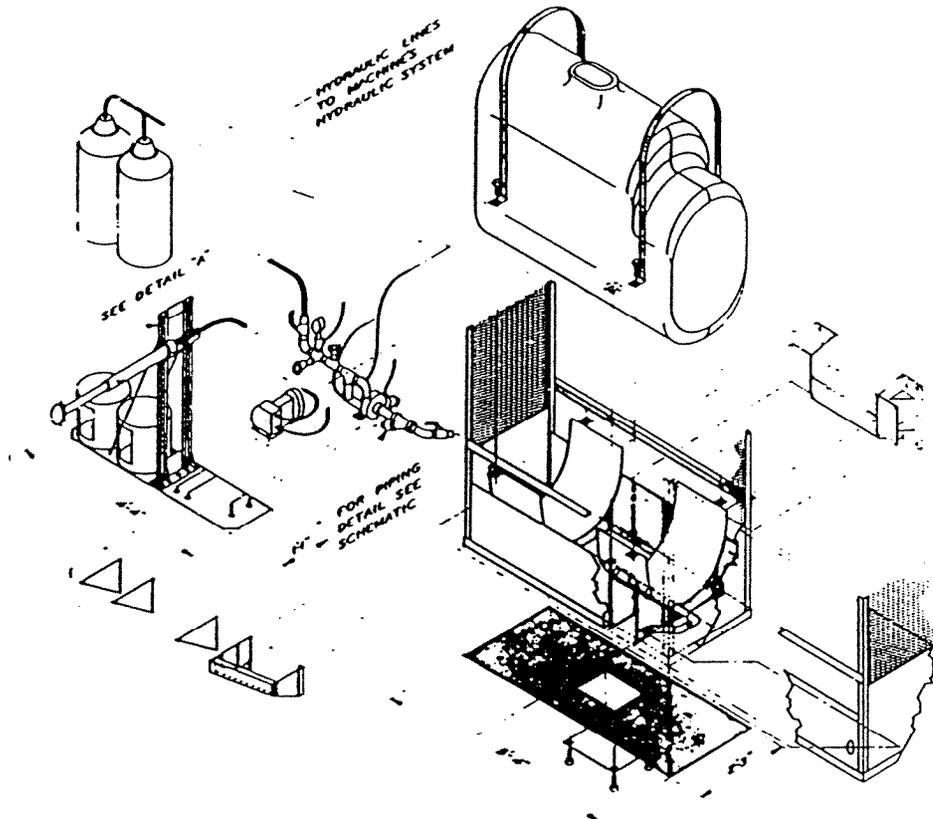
Expanded isometric view of a spray system that mounts on a crawler tractor.
